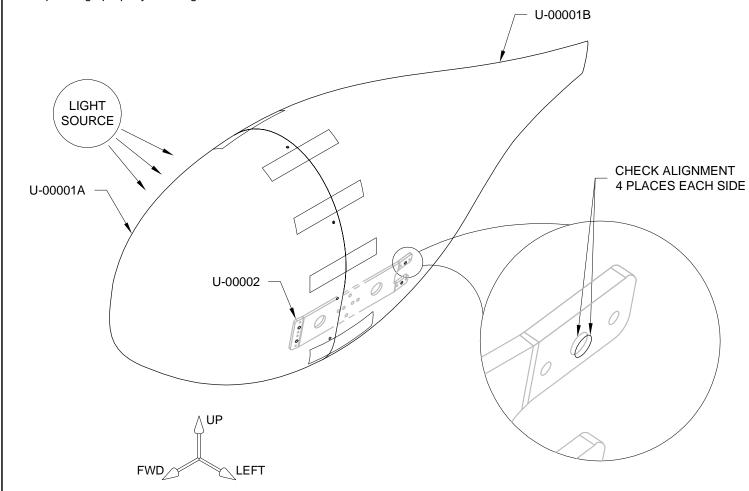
ALIGNING THE WHEEL FAIRING HALVES
